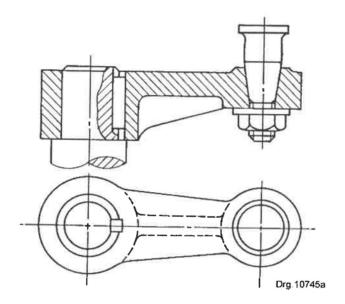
Rib, shaft, key, crank pin, nut and washer, not sectioned
